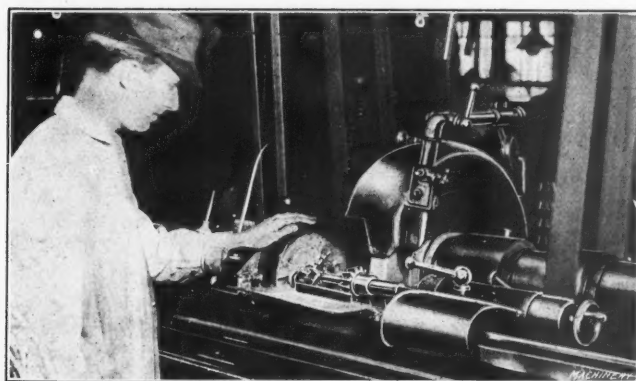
Grinding Bevel Gear Hub with a Wide-faced Wheel
